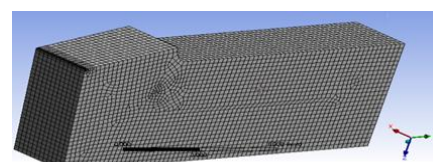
Three-dimensional model of simple cutting wedge in rectangular free cutting realized by turning the periphery of machined material disk with radial feed tool
